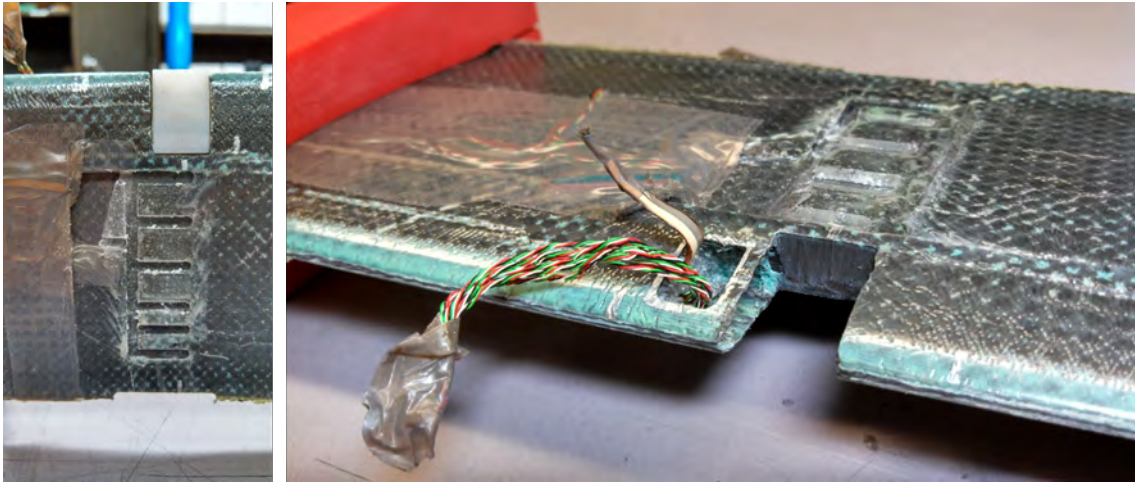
Molded and milled compartments in the trailing edge for pressure transducers and the 3D-printed nose piece.
